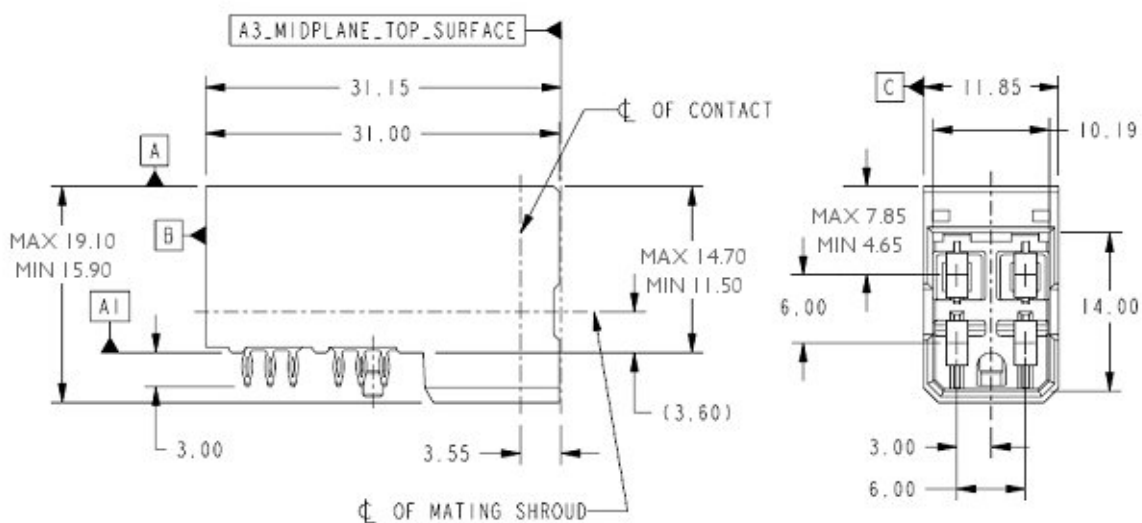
SBBMI Canister Power Header Dimensions<sup>2</sup>
